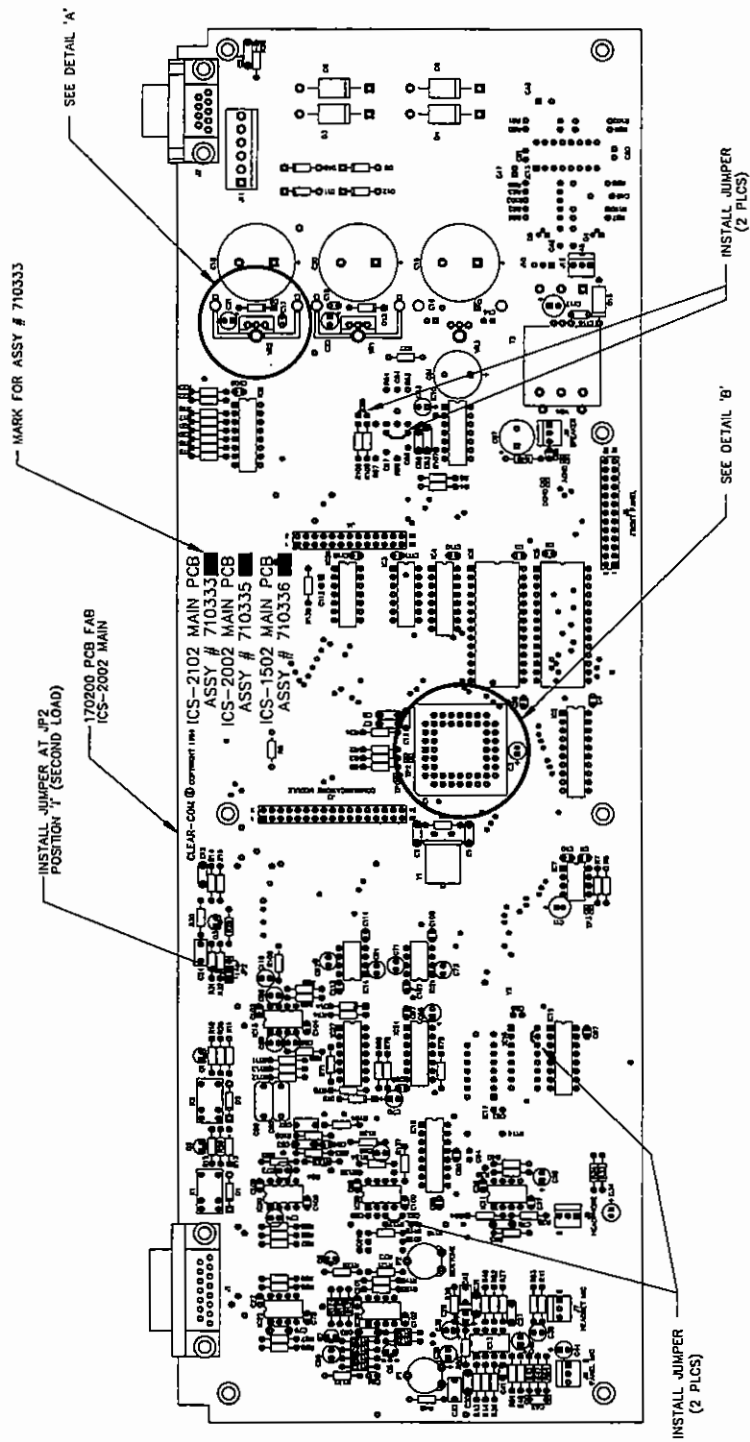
Assembly Drawing - ICS-2102 Main PCB Rev. B
